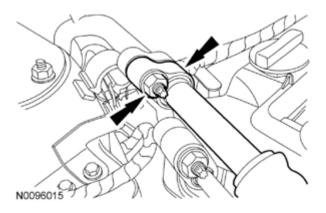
Locating A/C Tube Nut And O-Ring Seal
